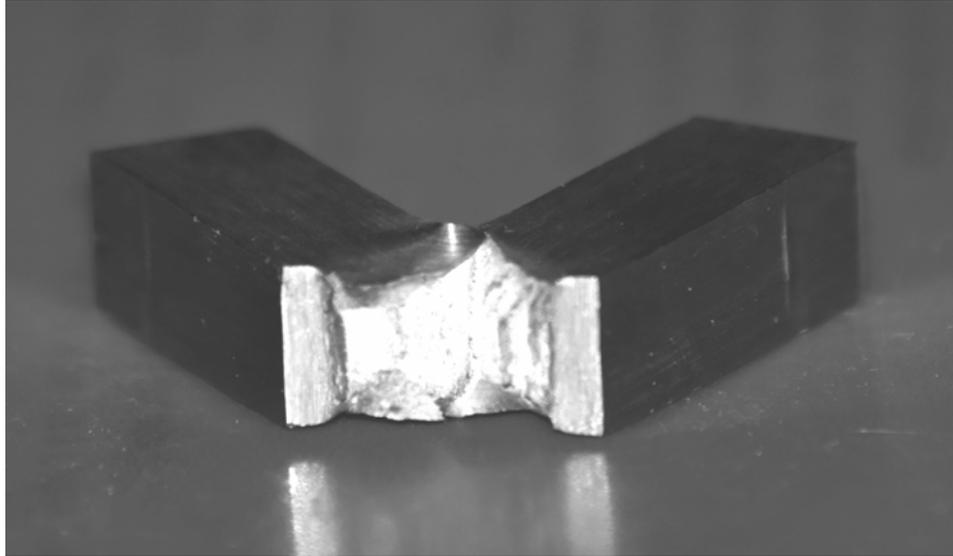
Charpy specimen of A710 Grade B with 0.10 % Ti tested at -40°C . The specimen stopped Charpy hammer without fully fracturing. Fracture surface is completely ductile
